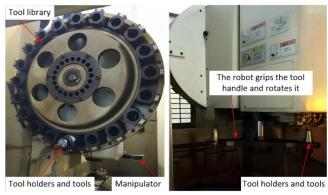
Application of robots in the vertical machining centre tool changer [92]
